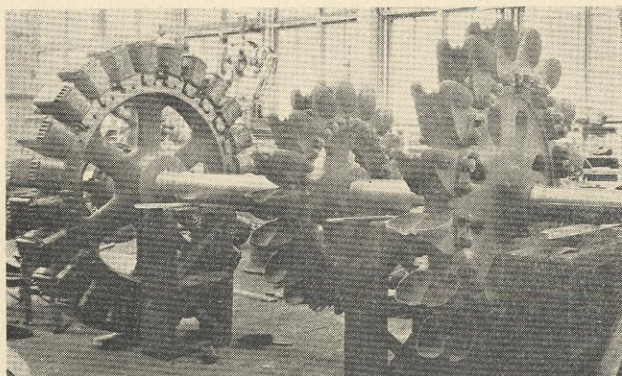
DOUBLE RUNNER WHEEL AND GENERATOR ROTOR
